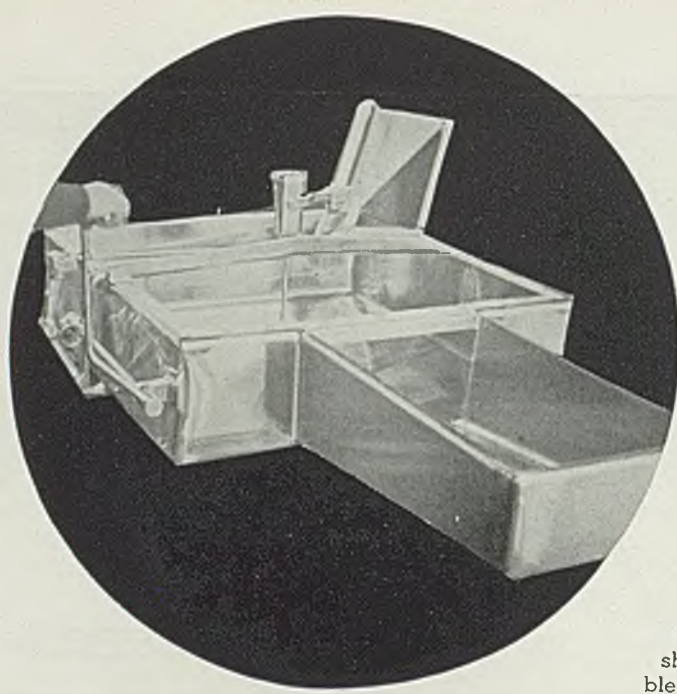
Typical piece of dairy equipment made of arc welded stainless steel. Joints take same high polish as the sheet itself—are almost impossible to locate on the finished work
